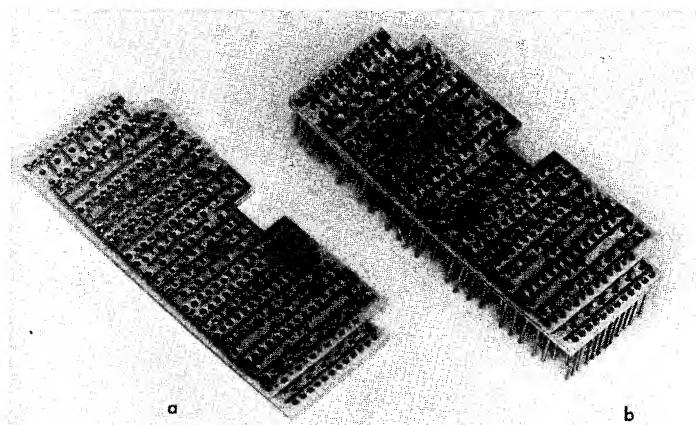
Special printed circuit welded matrix: (a) nested for welding, (b) with tubes welded in position.
